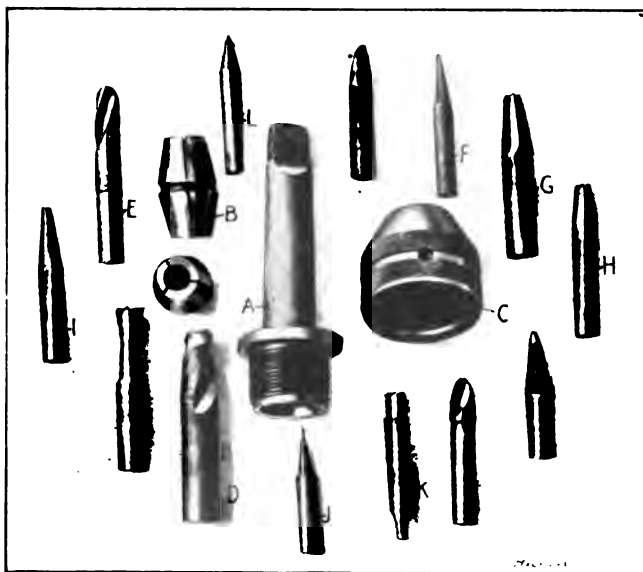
Chuck Parts and Cutters for the Die-sinking Machine
